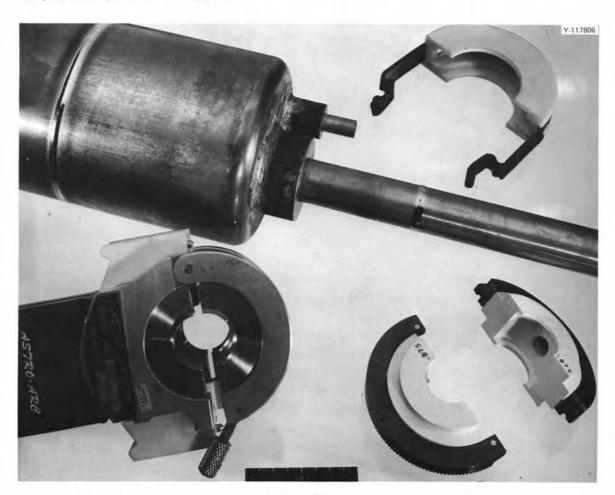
Orbiting-arc weld head and $\frac{7}{8}$ -in.-diam tube-to-tube butt weld.
